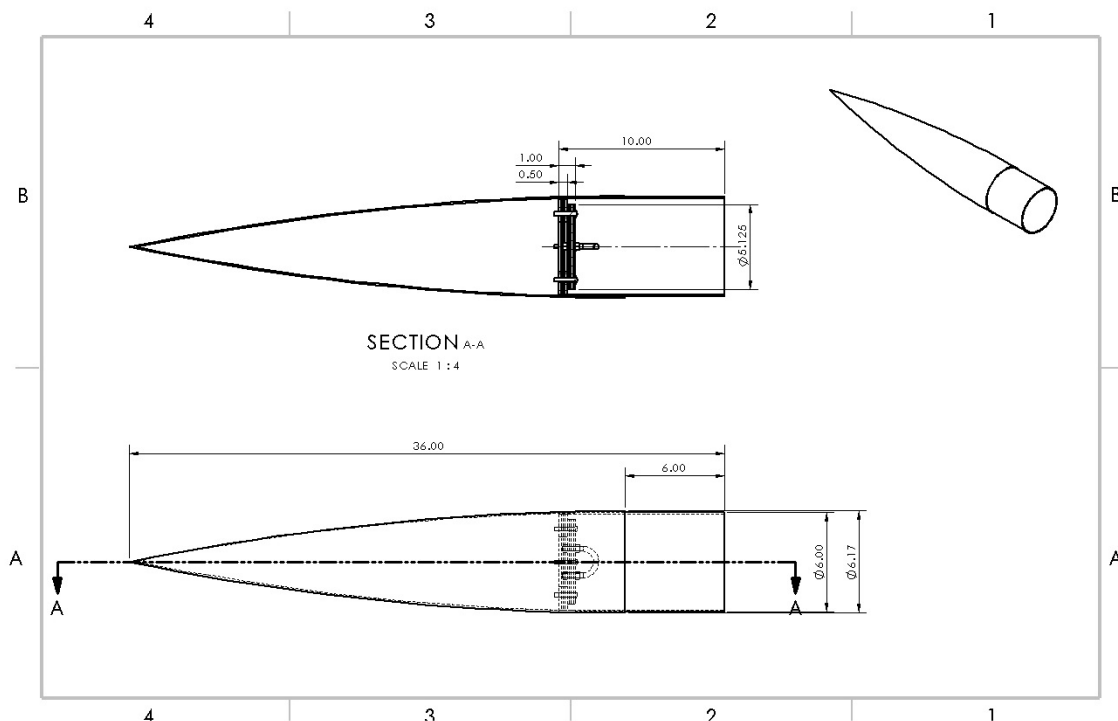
CAD model of the nose cone with the removable bulkhead assembly and dimensions.
